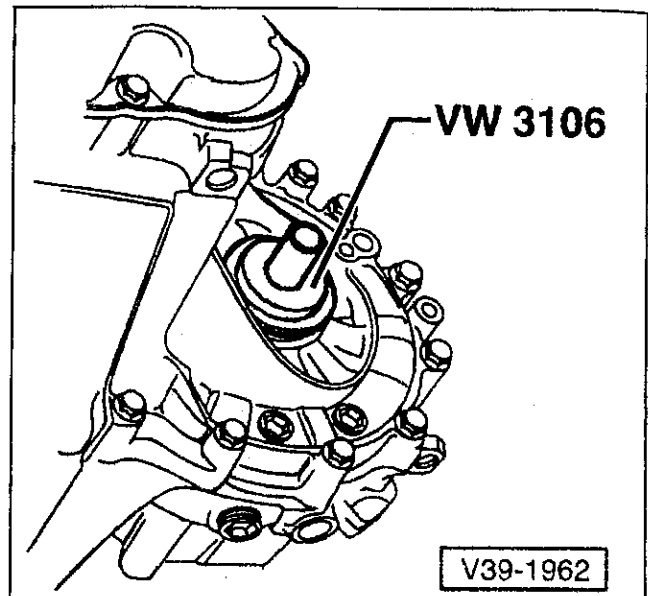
Drive flange oil seal being installed with seal driver (Volkswagen special tool no. VW 3106).
